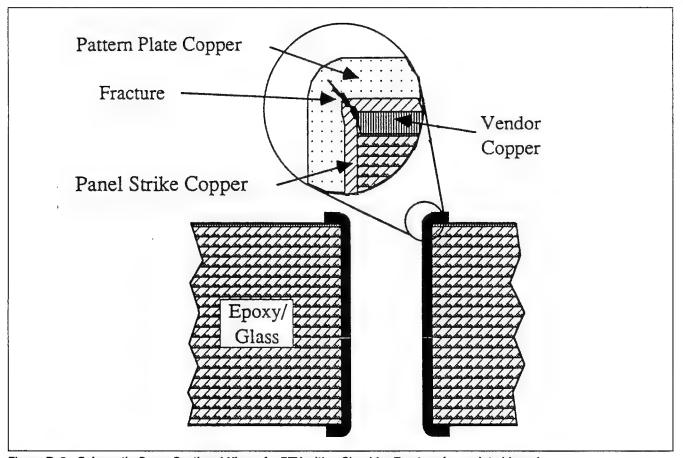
Schematic Cross-Sectional View of a PTV with a Shoulder Fracture in a printed board
